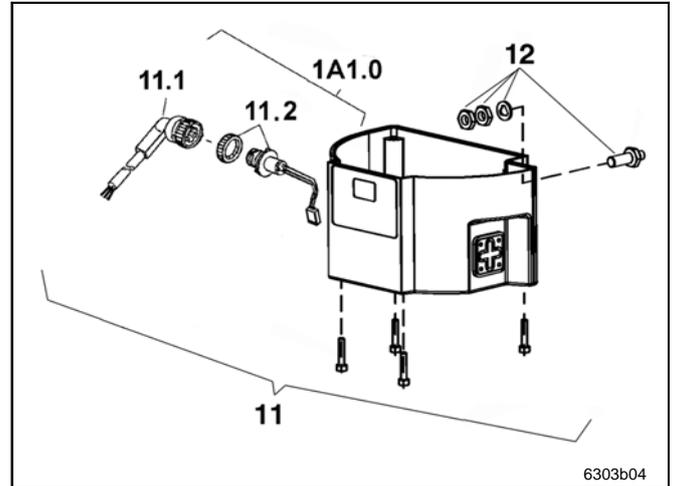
QLS 301 housing with back-mounted SSV metering device and bayonet plug (replacement of pos. 11, Fig. 50)
